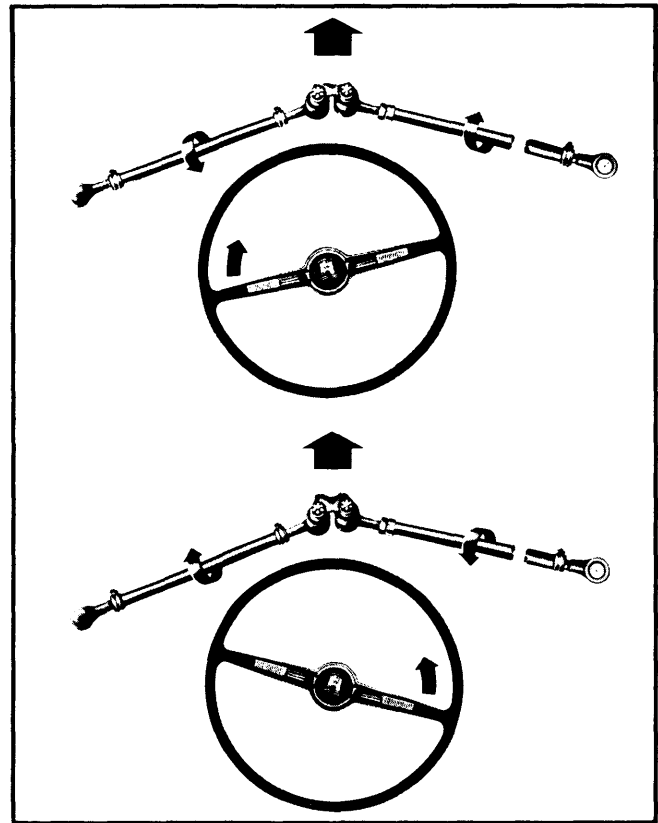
Direction of Tie Rod Rotation to Align Steering Wheel (Type 1 Only)
